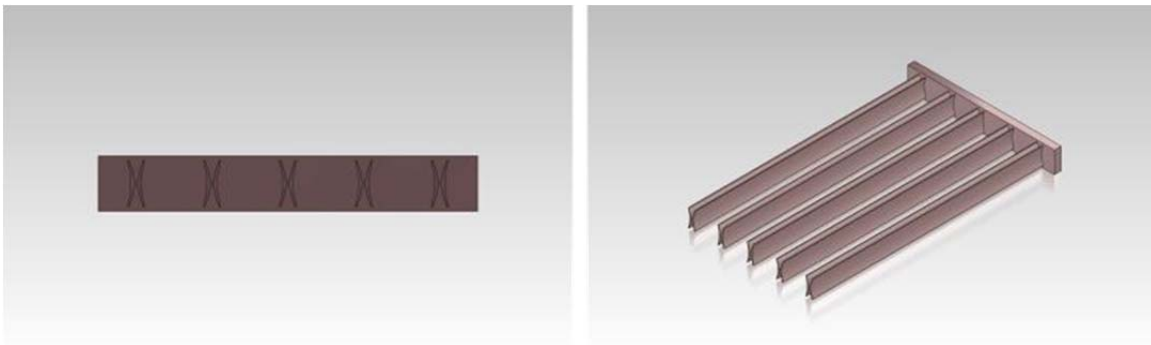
NTG channel shape comb can be used for mold tool that can make S111 panel without hourglass machine.
